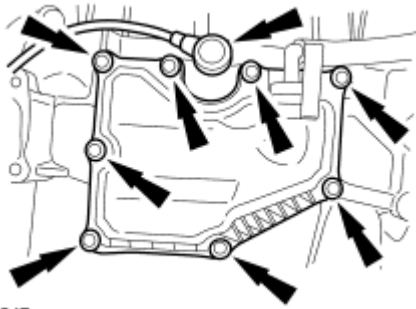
Locating LH Engine Mount Bracket Bolts
